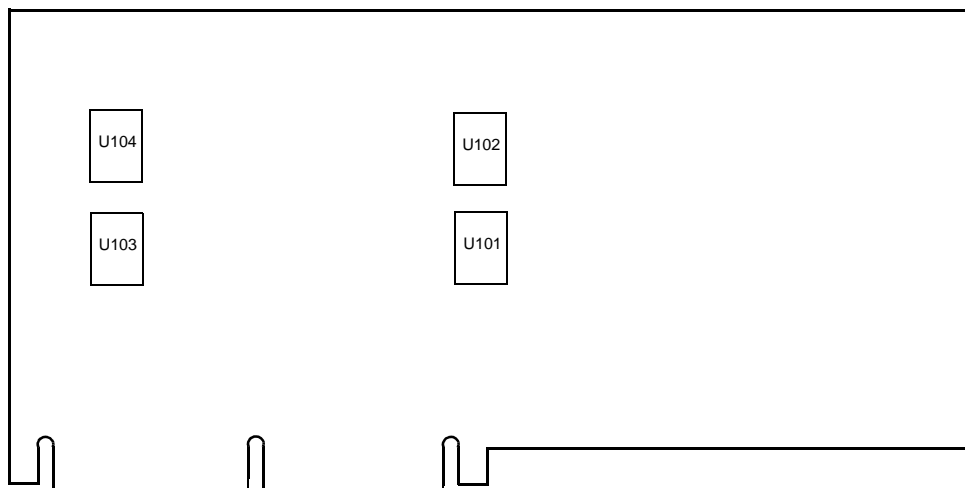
shows the AlphaPC 264DP daughtercard and its components, and Table 2–2 describes these components.
